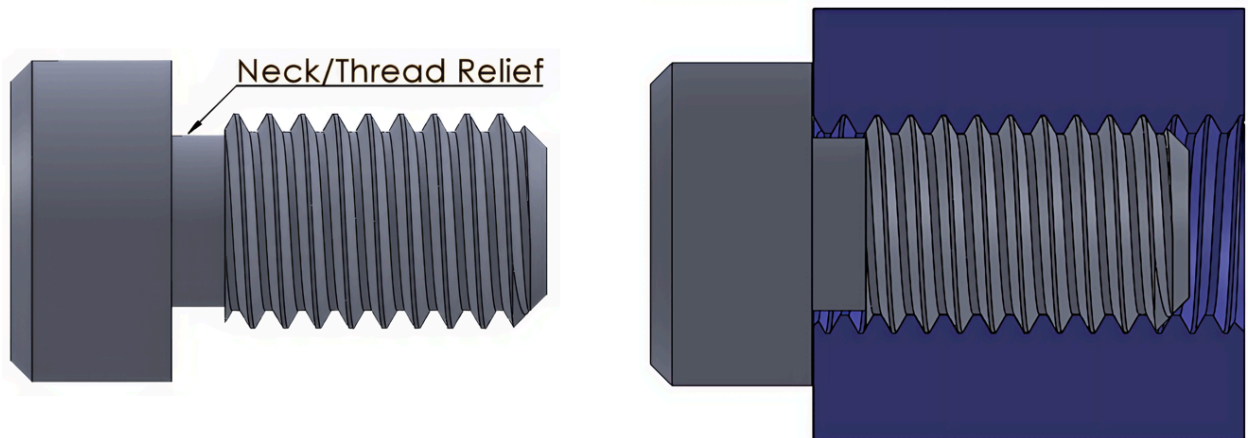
A neck allows threads to be fully engaged and can provide clearance during threading operations.
